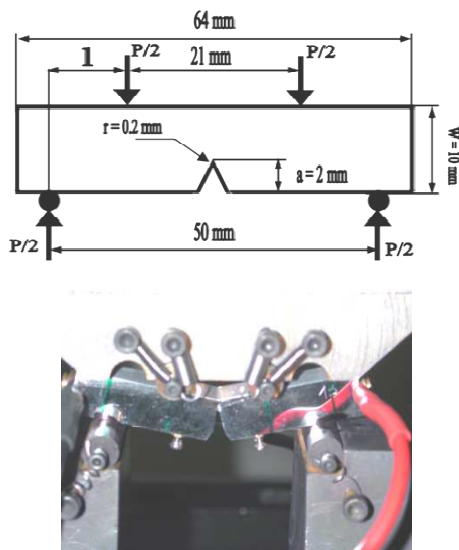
V-notch sample in four points bending fatigue test and dimensions
